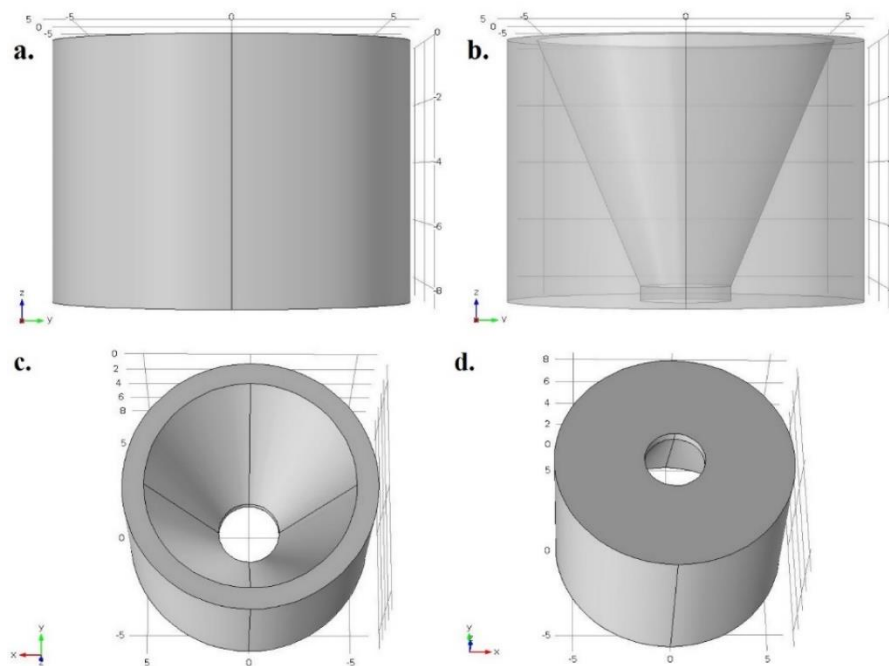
Schematic illustration of outer part of full length spinneret design prototype 1, (a. solid front view, b. transparent front view, c. inclined top view, d. inclined bottom view)
